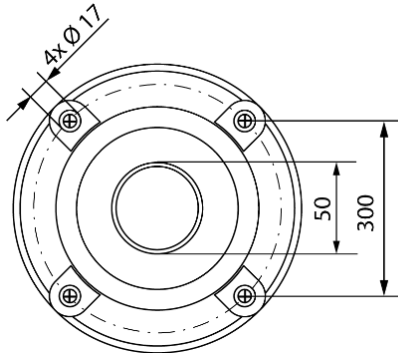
Mounting holes foot/ column with steering linkage for interior operation
